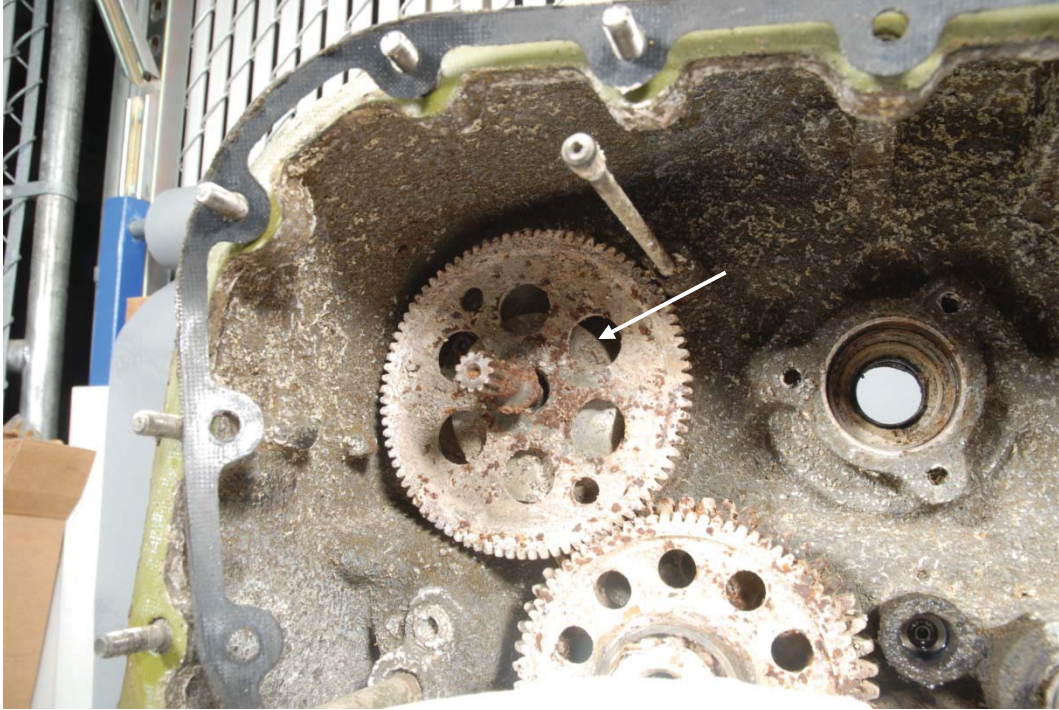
P-79001C, Fuel-Pump Drive Shaft
